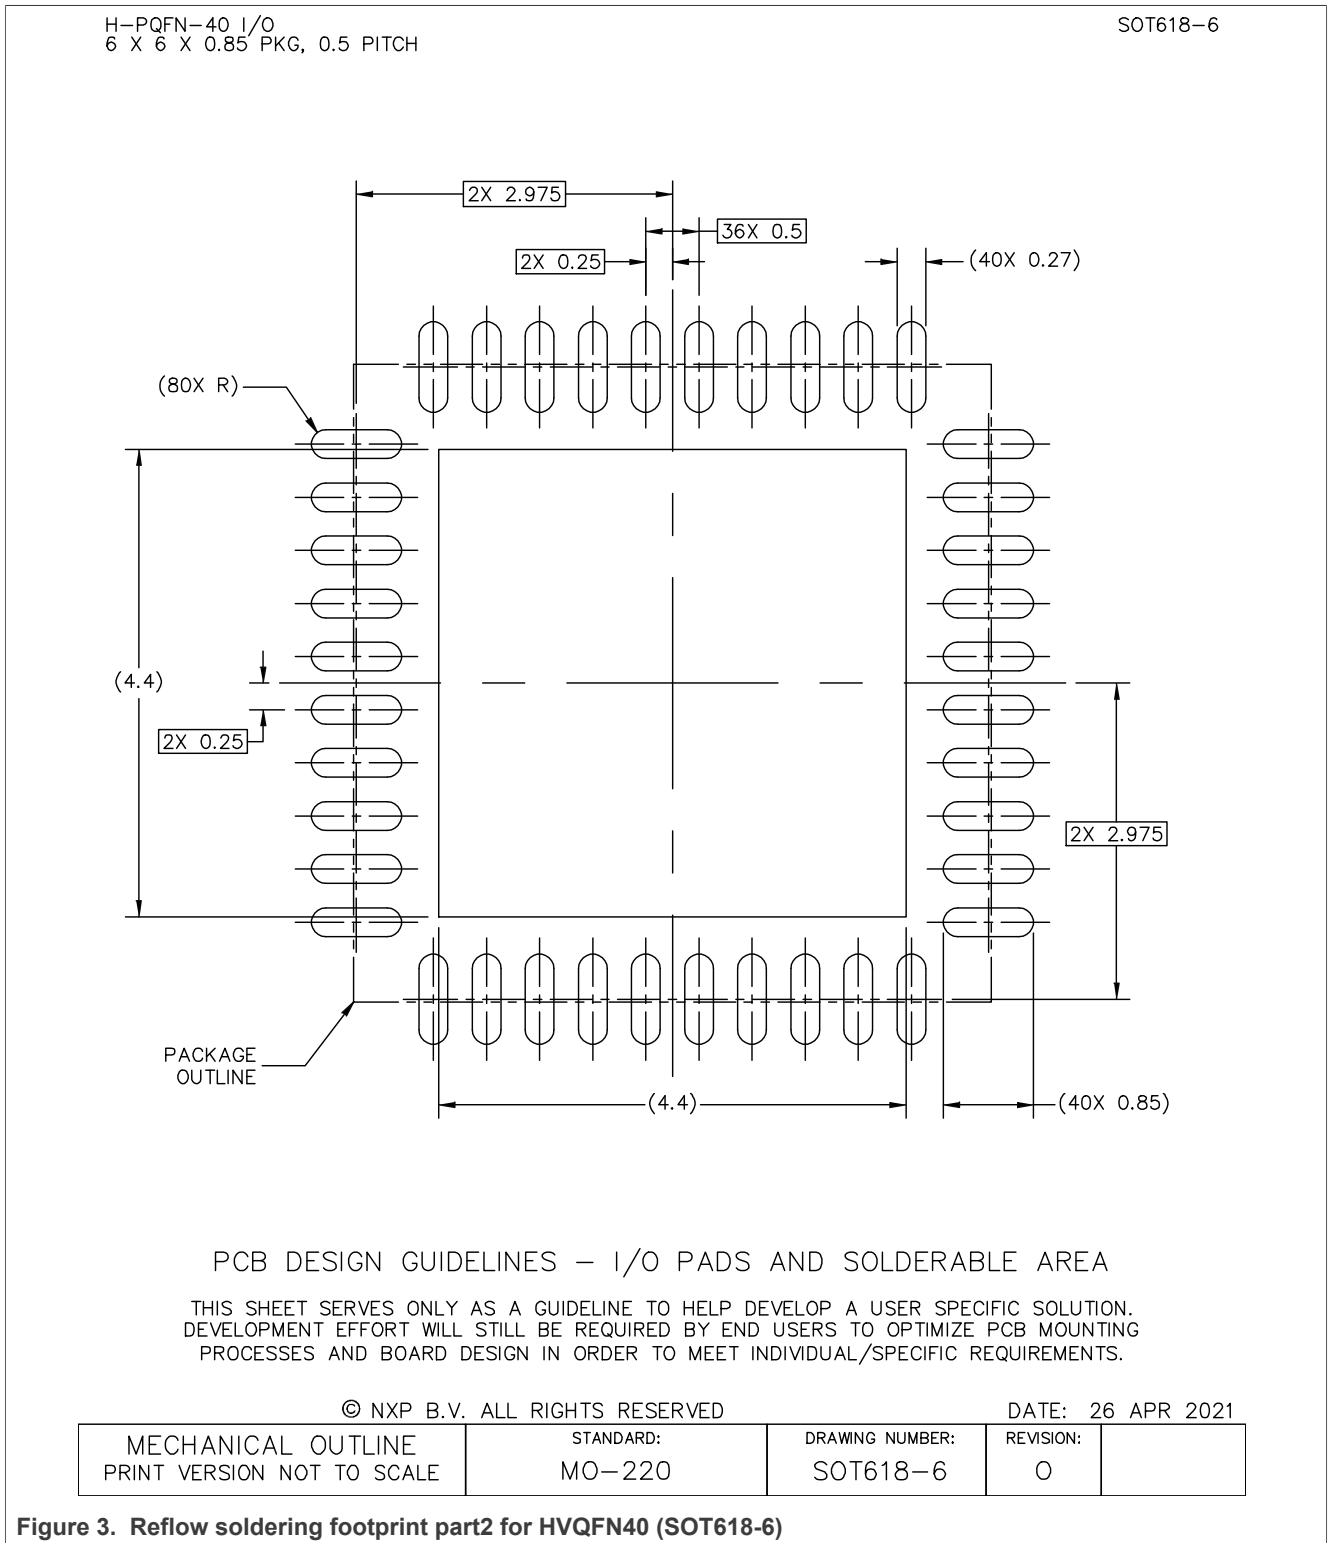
Reflow soldering footprint part2 for HVQFN40 (SOT618-6)
